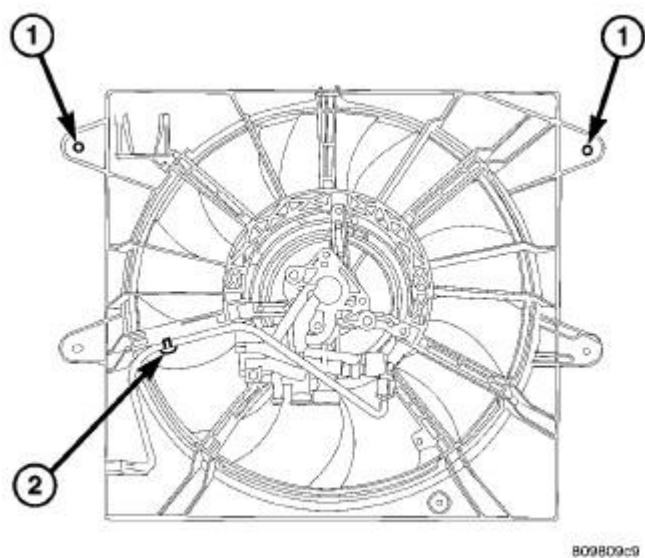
FAN SHROUD MOUNTING BOLT LOCATIONS
